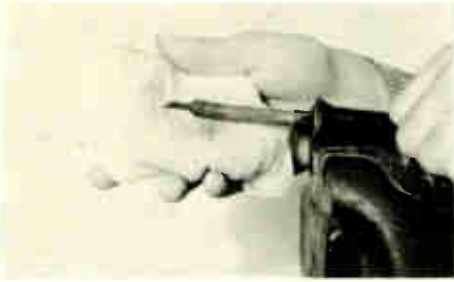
Wiping excess solder from the iron with a piece of cloth.
